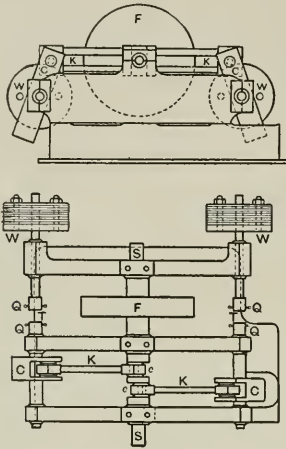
STROMEIER'S MACHINE FOR MEASURING ALTERNATING TORSION
